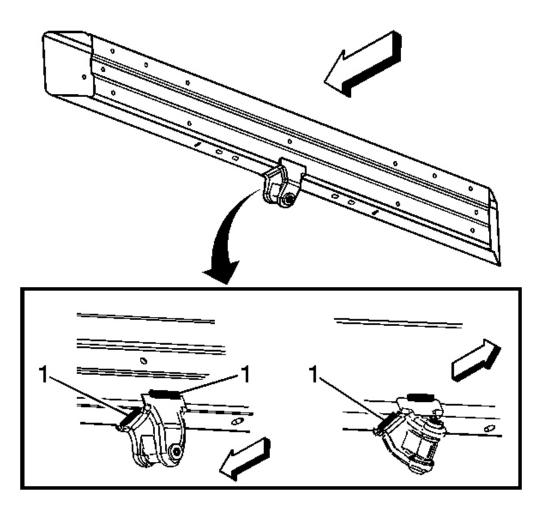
View Of Welds - Rear Courtesy of GENERAL MOTORS CORP.
